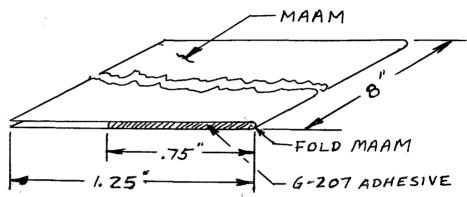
VAPOR BARRIER SEAM OUTGASSING SAMPLE
